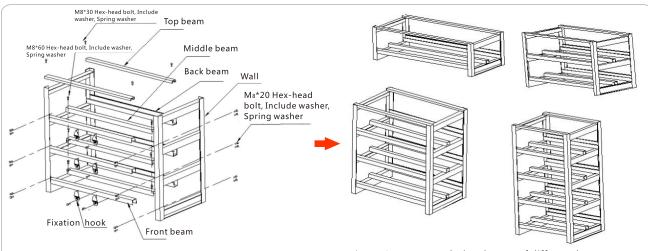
Battery rack explosive view (The components of rack assembled by bolts to be a whole)
